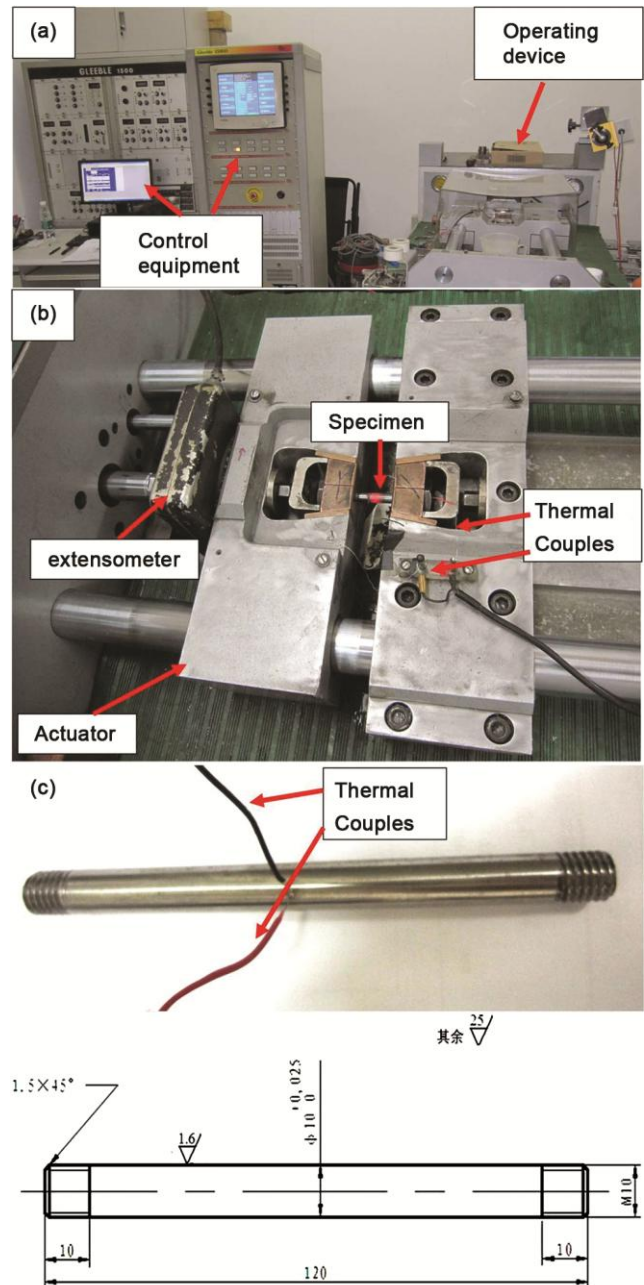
(a) Experimental equipment, (b) Operating device of hot tension and (c) Tension specimen with its size.
